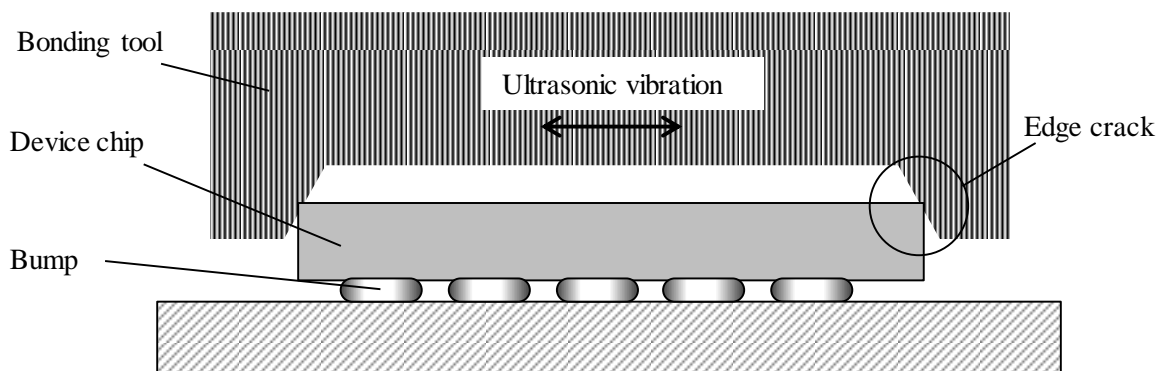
Bonding tool having chip holding shape can cause chip edge crack.
